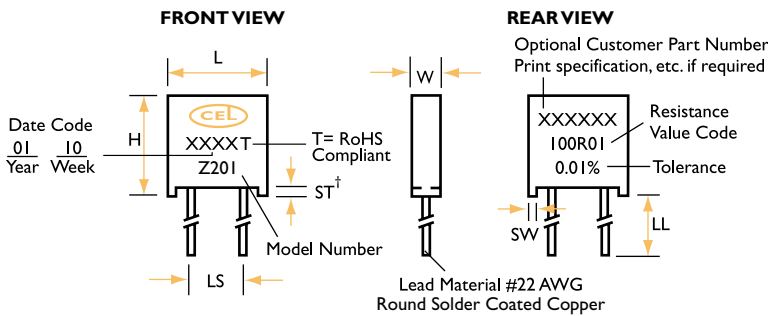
STANDARD IMPRINTING AND DIMENSIONS
